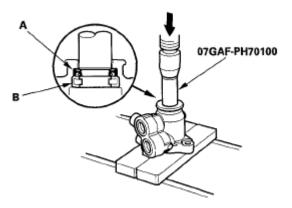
Removing Valve Oil Seal And Roller Bearing Out Of Valve Housing Using Hydraulic Press Courtesy of AMERICAN HONDA MOTOR CO., INC.
